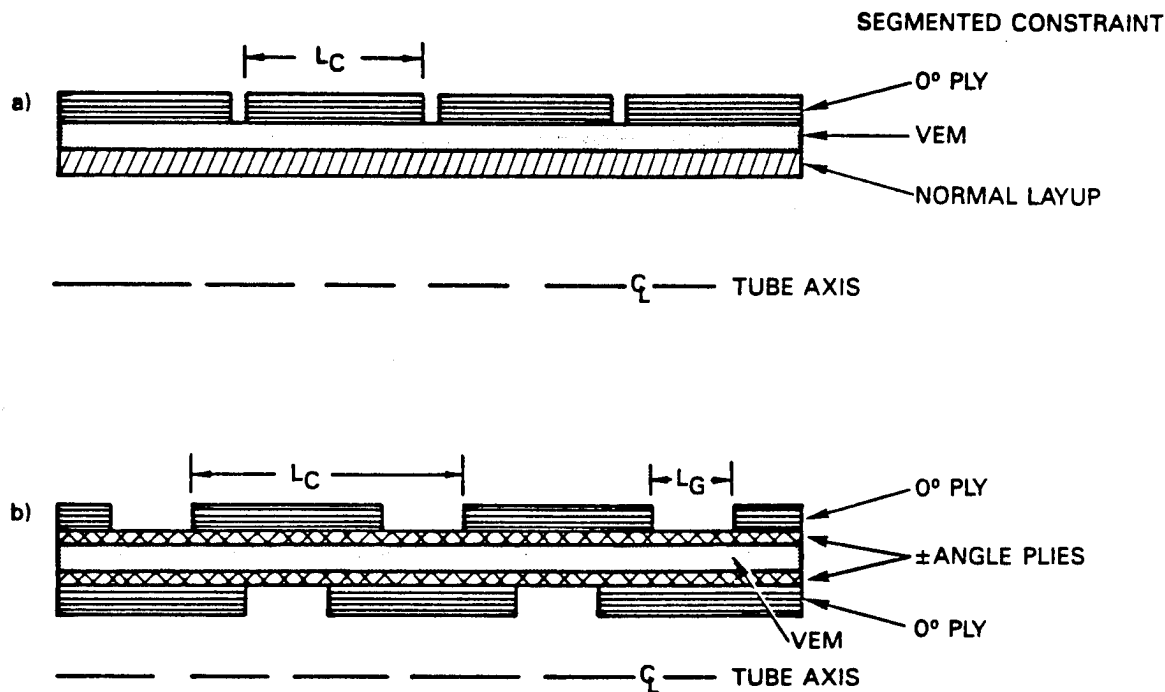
Layup Details and Geometric Design Variables for: a) Uniform Segmented Constraining Layer and b) Alternating Ply Concept.
